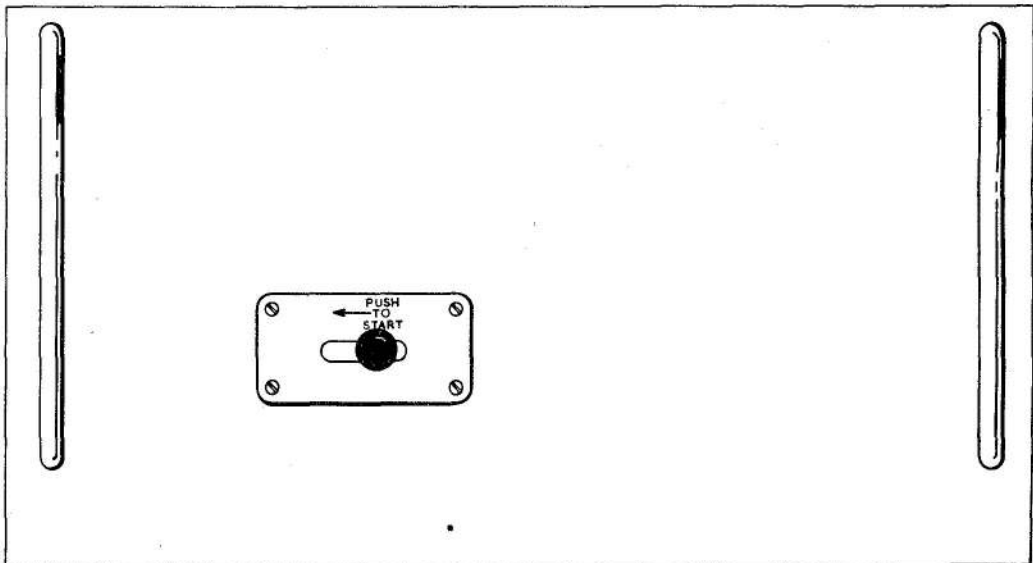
Tacho bedplate unit, Type QT4074—front panel
